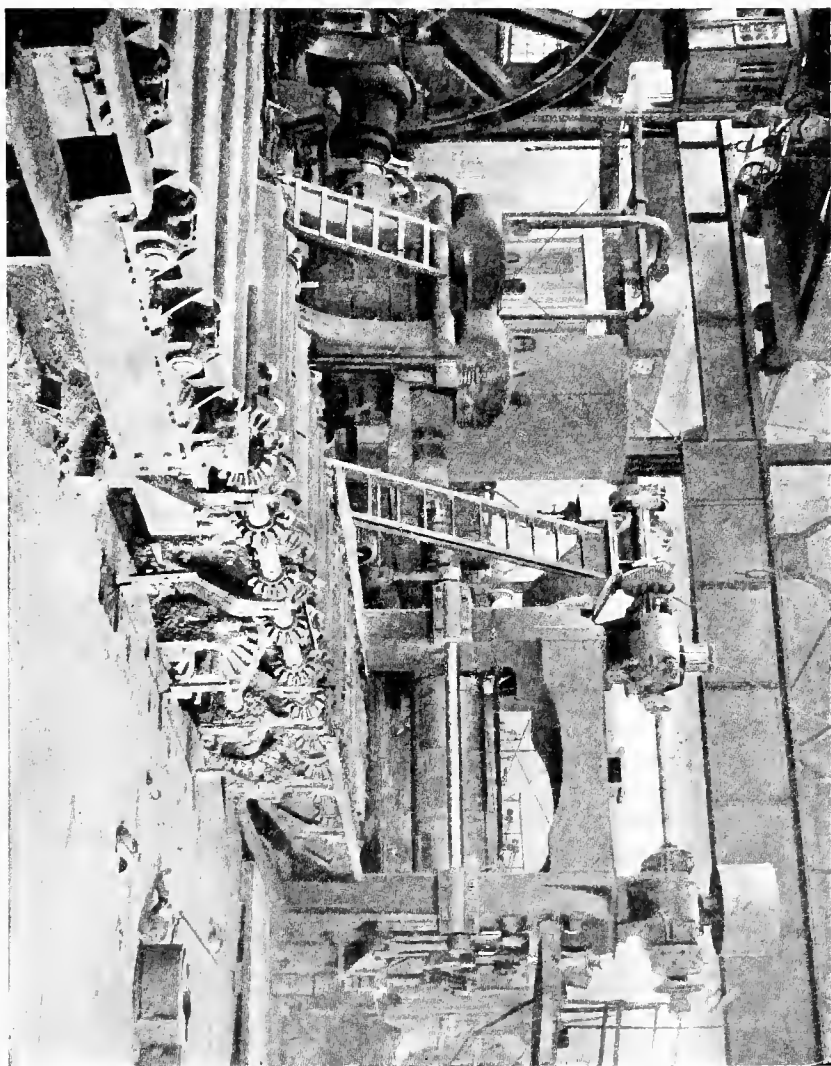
84-inch Plate Mill installed by The United Engineering and Foundry Company.
